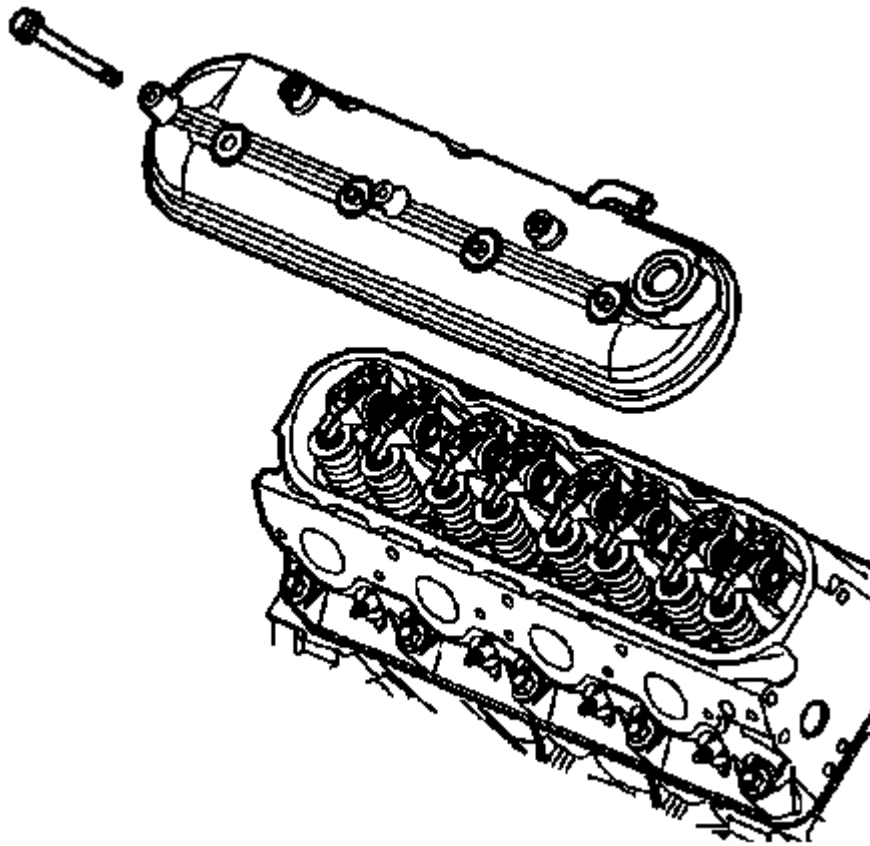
Valve Rocker Arm Cover Onto Cylinder Head
